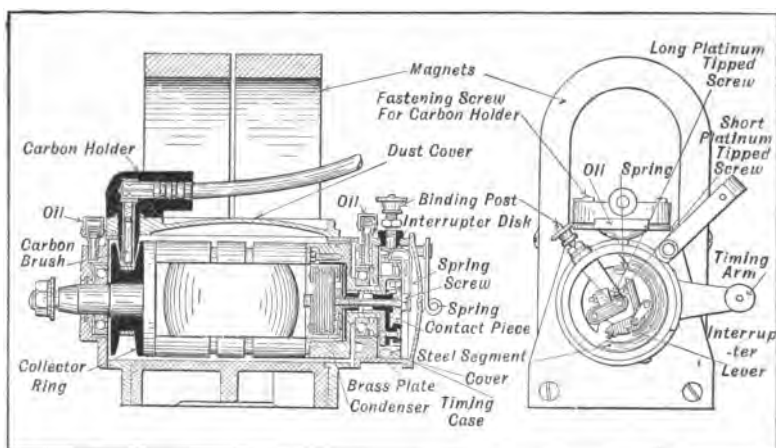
Simple High Tension Magneto for One Cylinder Ignition, a Complete Apparatus Comprising Source of Current and Timing Device as Well.
